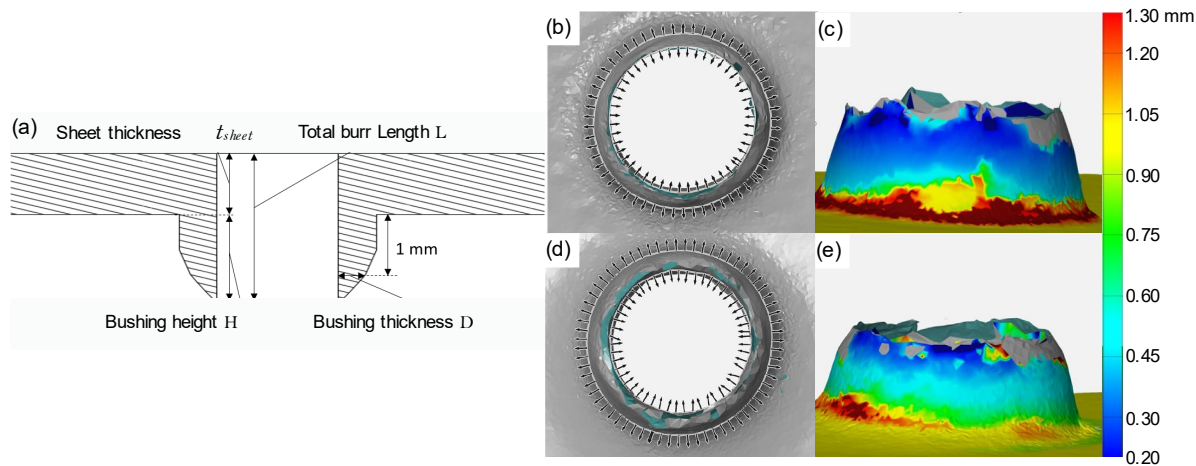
(a) Dimensions nomenclature for friction drilling in this paper, (b & c) Thickness measurement of cold friction drilled hole, (d & e) Thickness measurement of pre-heated friction drilled hole.
